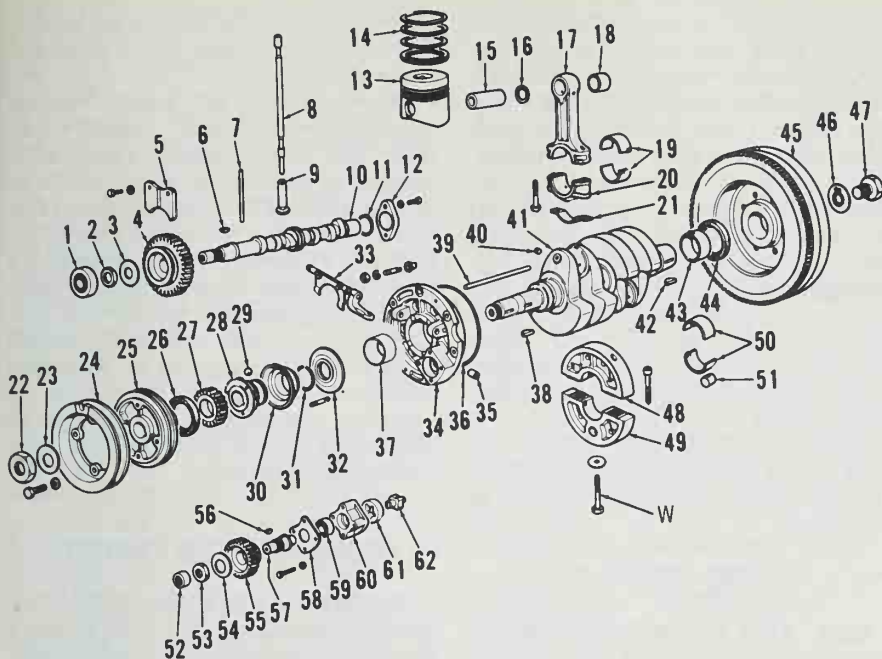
Exploded view of crankshaft, camshaft and oil pump assemblies.
